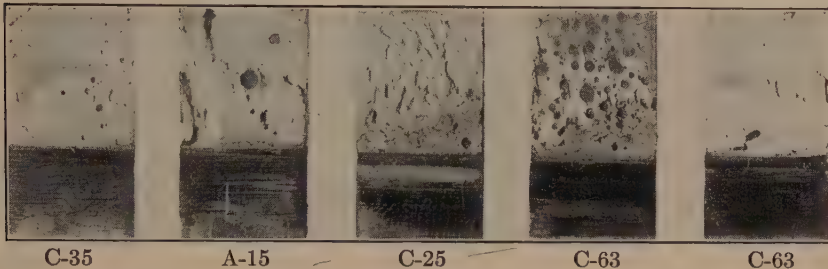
BRASS LAP JOINTS BY CLOSED METHOD OF SOLDERING, SHOWING POROSITY AND FLUX INCLUSIONS.
